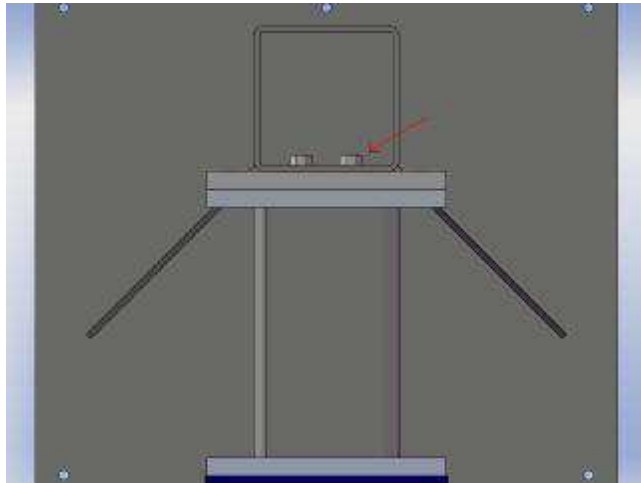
Six (6) M12 pattern for fastening rear plate of Extension to Fixture Base.
